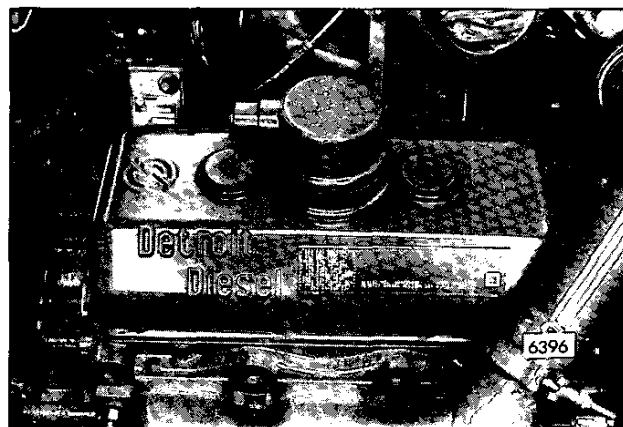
Die-Cast Aluminum Rocker Cover on 6V-53T Engine
